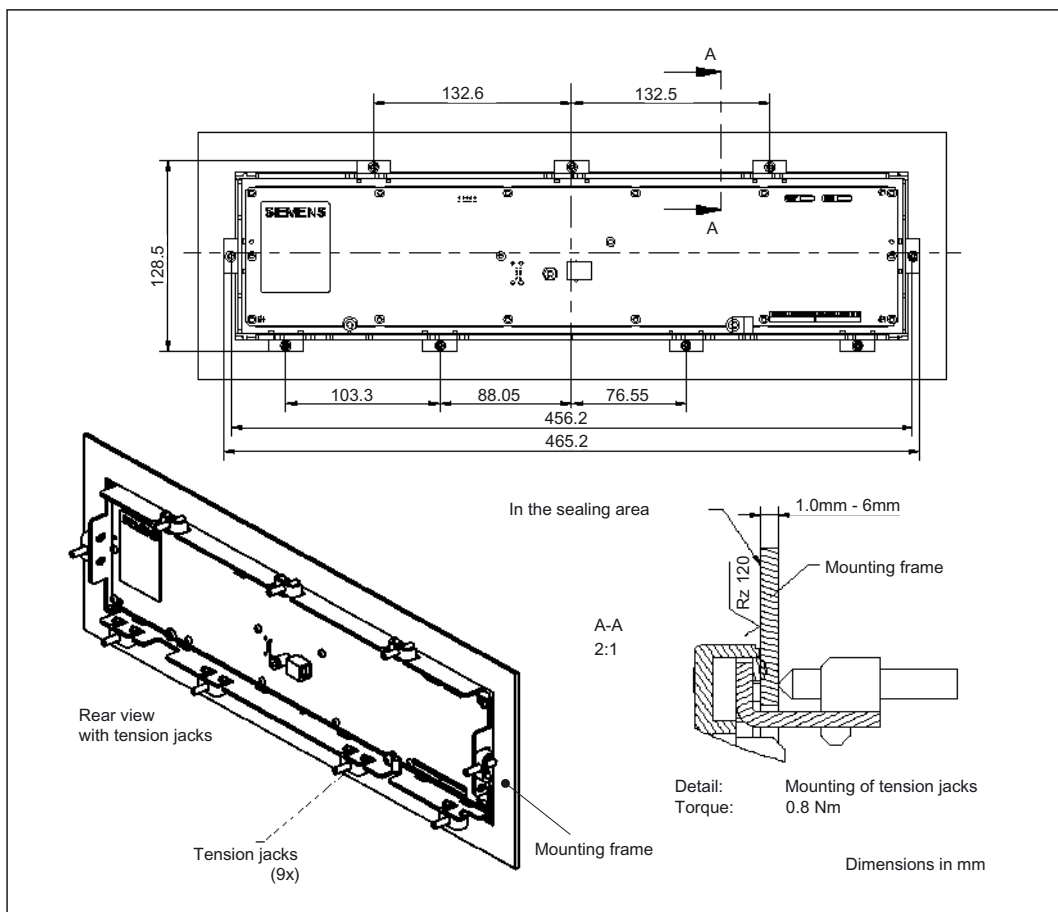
Dimension drawing for mounting the CNC full keyboard KB 483C
